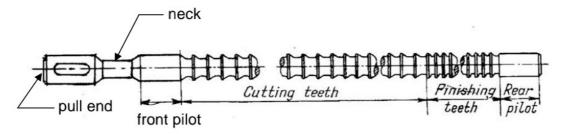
Configuration of a pull type broach used for finishing holes.
